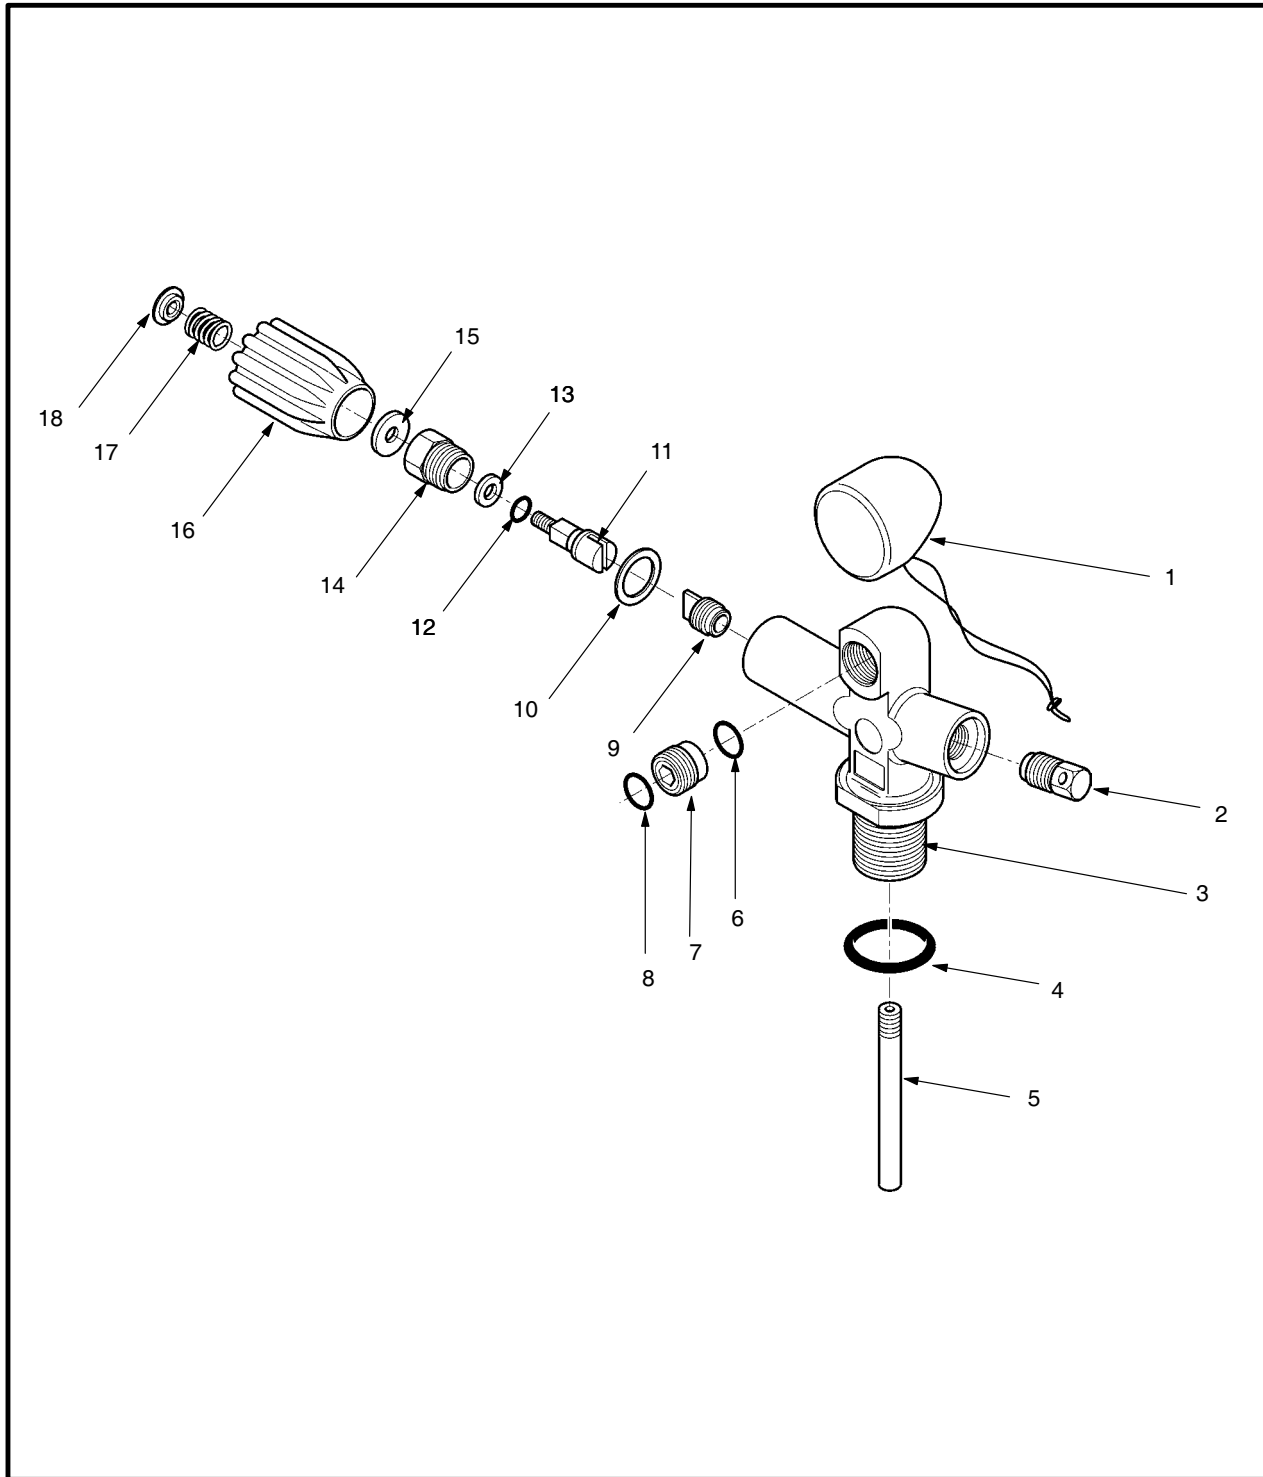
(Sheet 1 of 2) Cylinder Supply Valve Assembly
